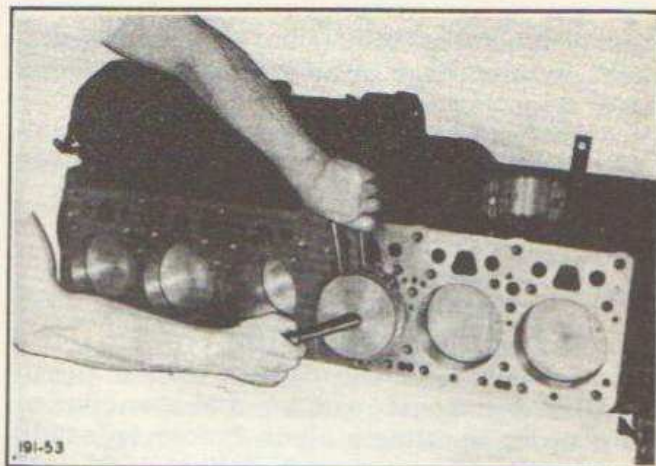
Inserting Piston in Engine Using Ring Compressor
